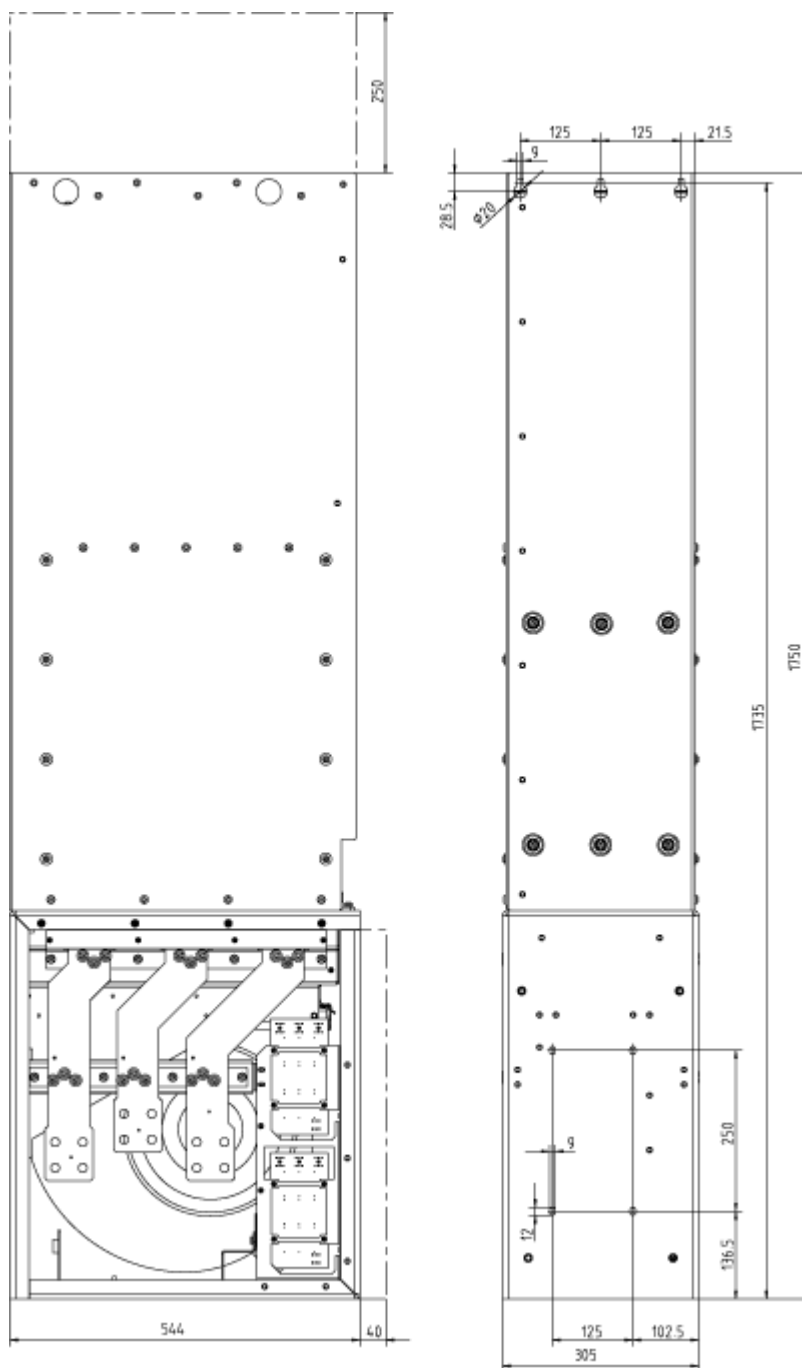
Dimension drawing for Active Interface Module, frame size HI Side view, rear view
